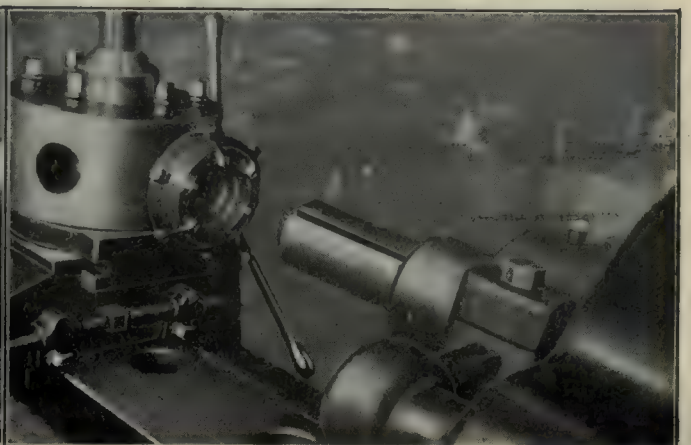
VIEW OF ARBOR AND THREAD DIE
